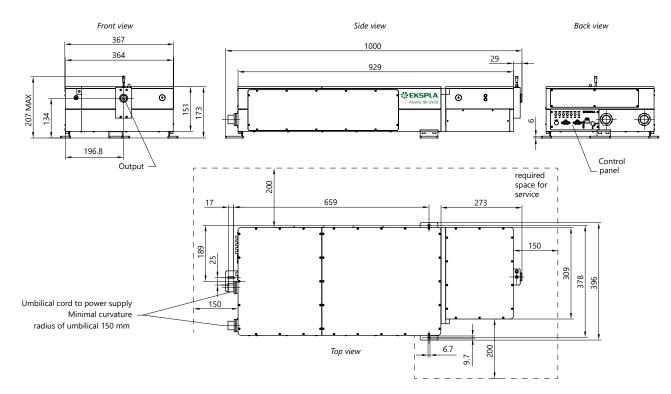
Outline drawings of Atlantic 50-UV18, 80-UV30 laser head with a single 355 nm output (dimensions in mm)
